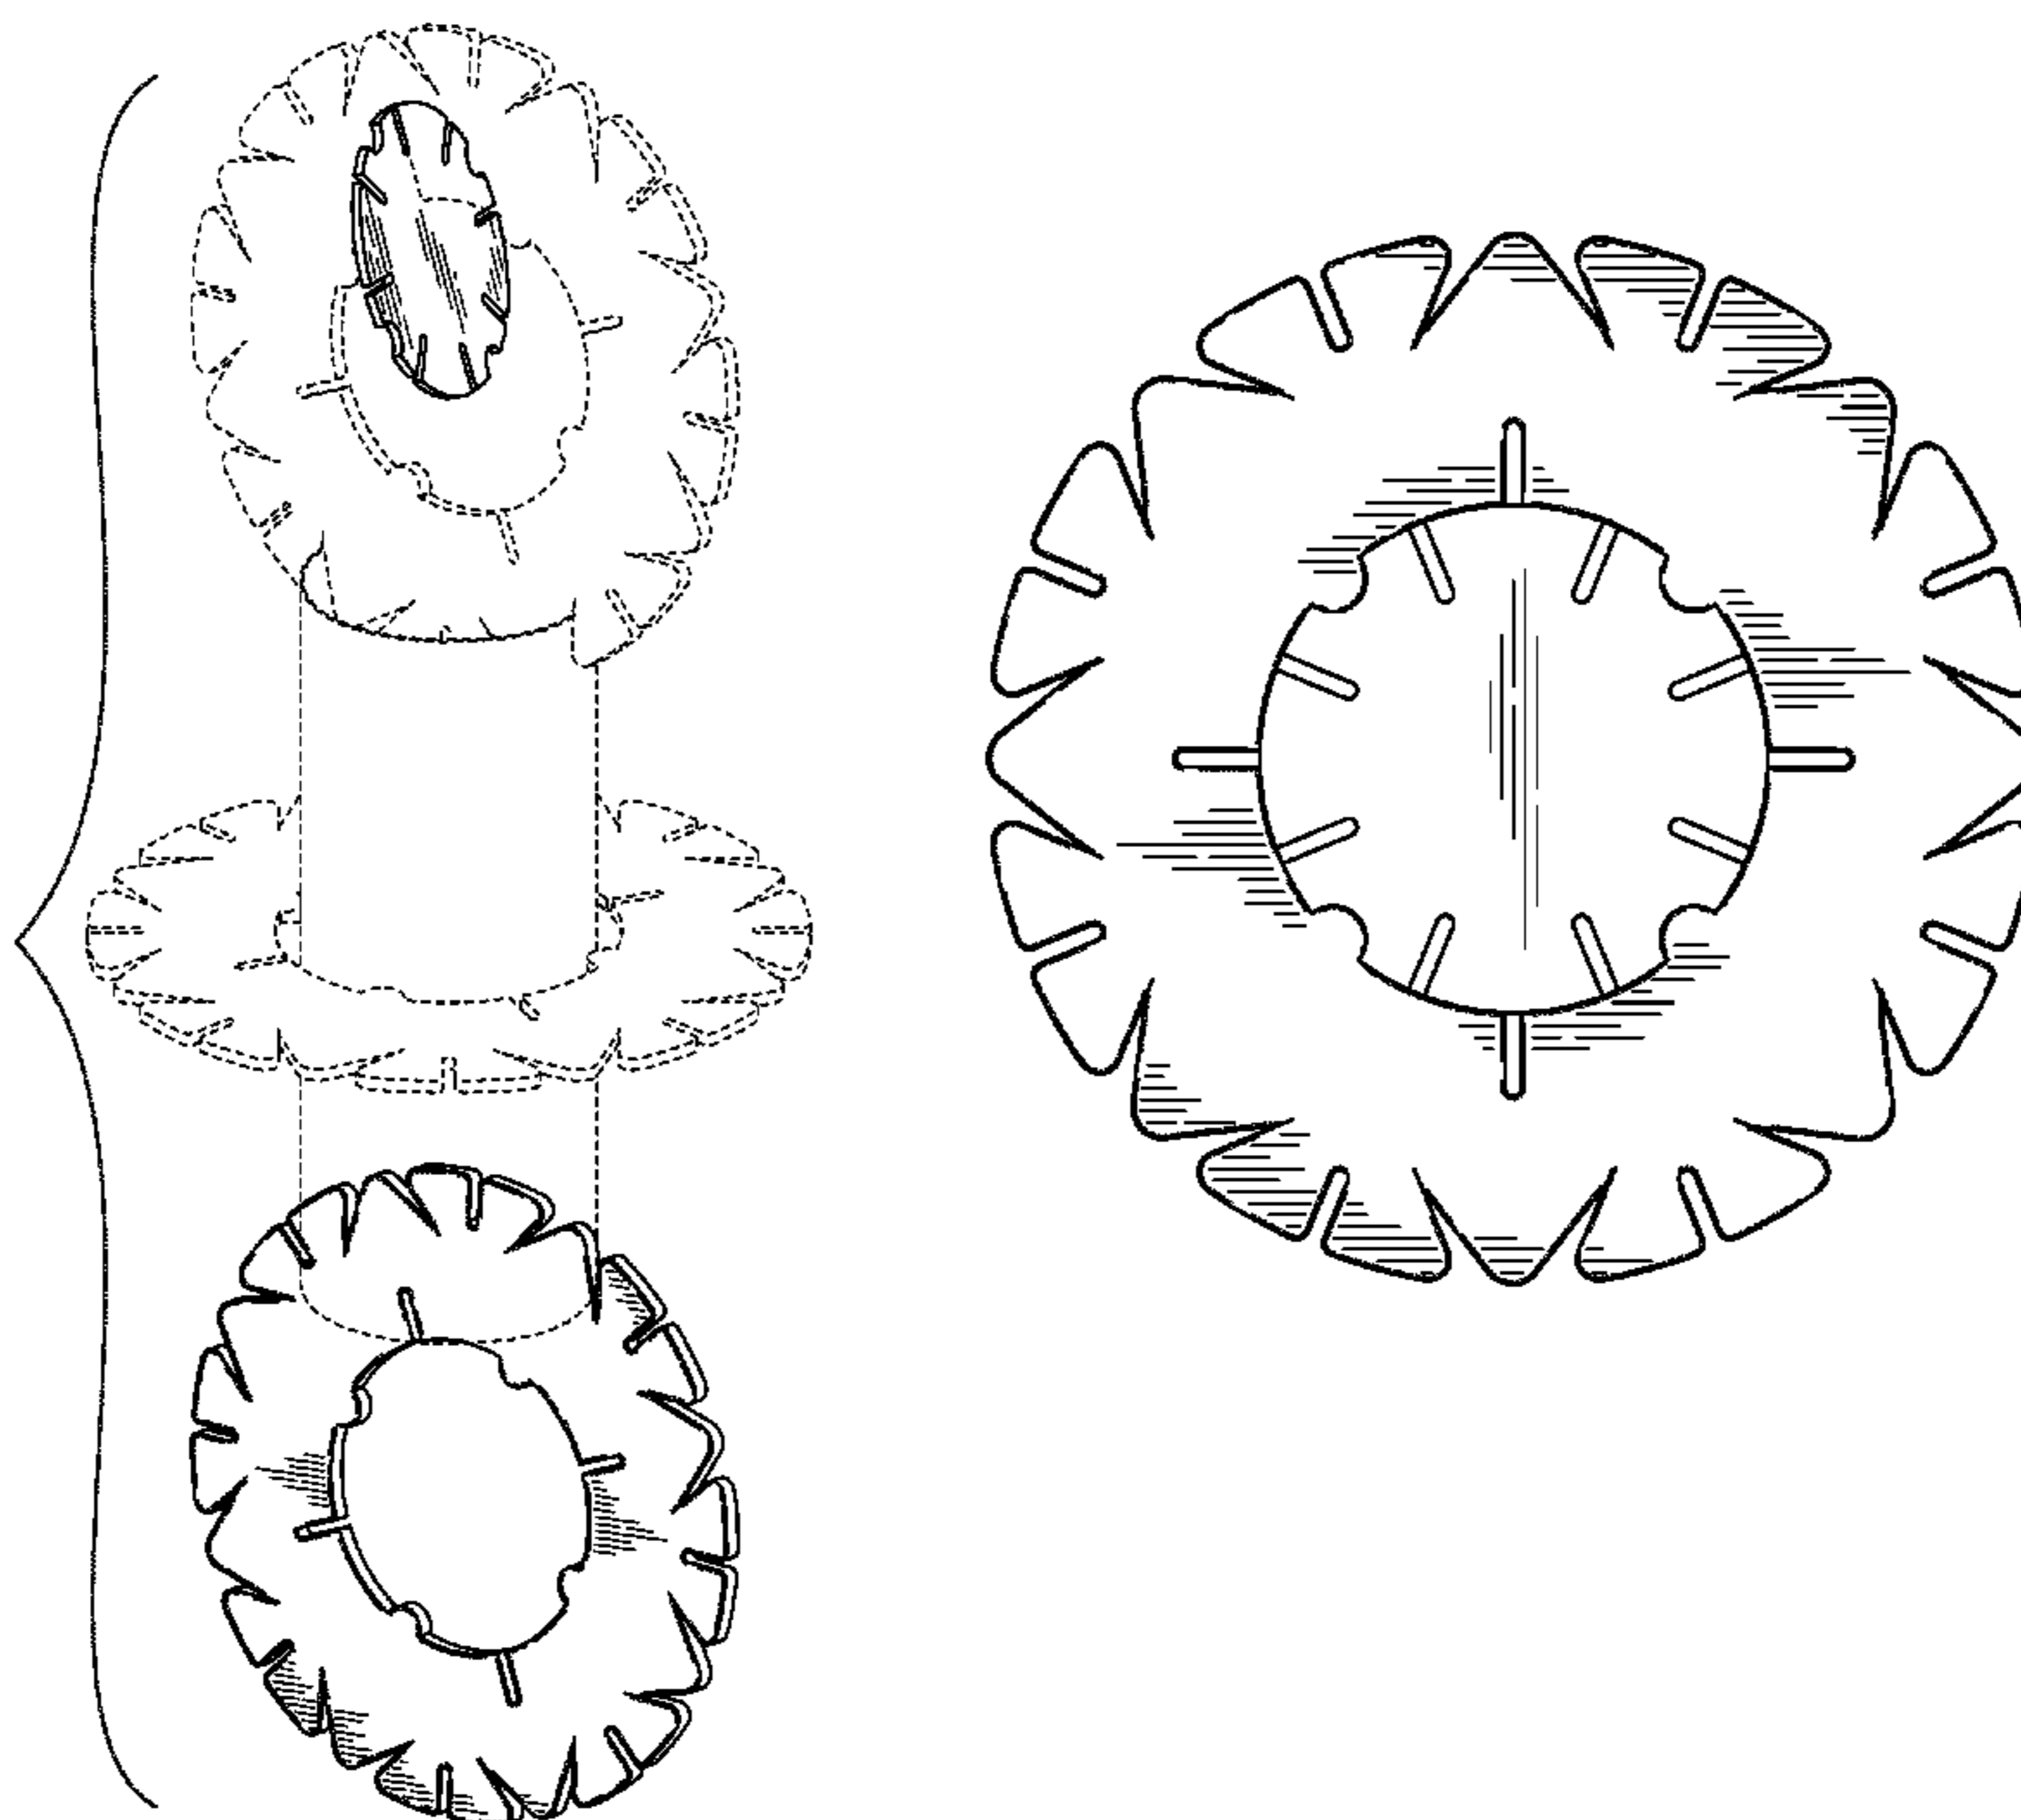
is an exploded perspective view of a paper construction toy, showing the new design;
